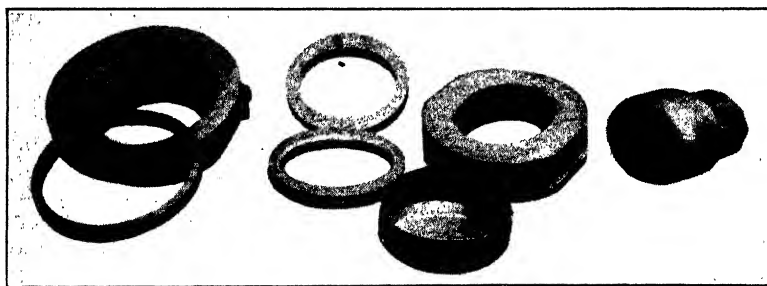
A double-action die for a $\frac{1}{4}$ -in. steel shell. The holder with shrunk steel ring is used for several operations.
